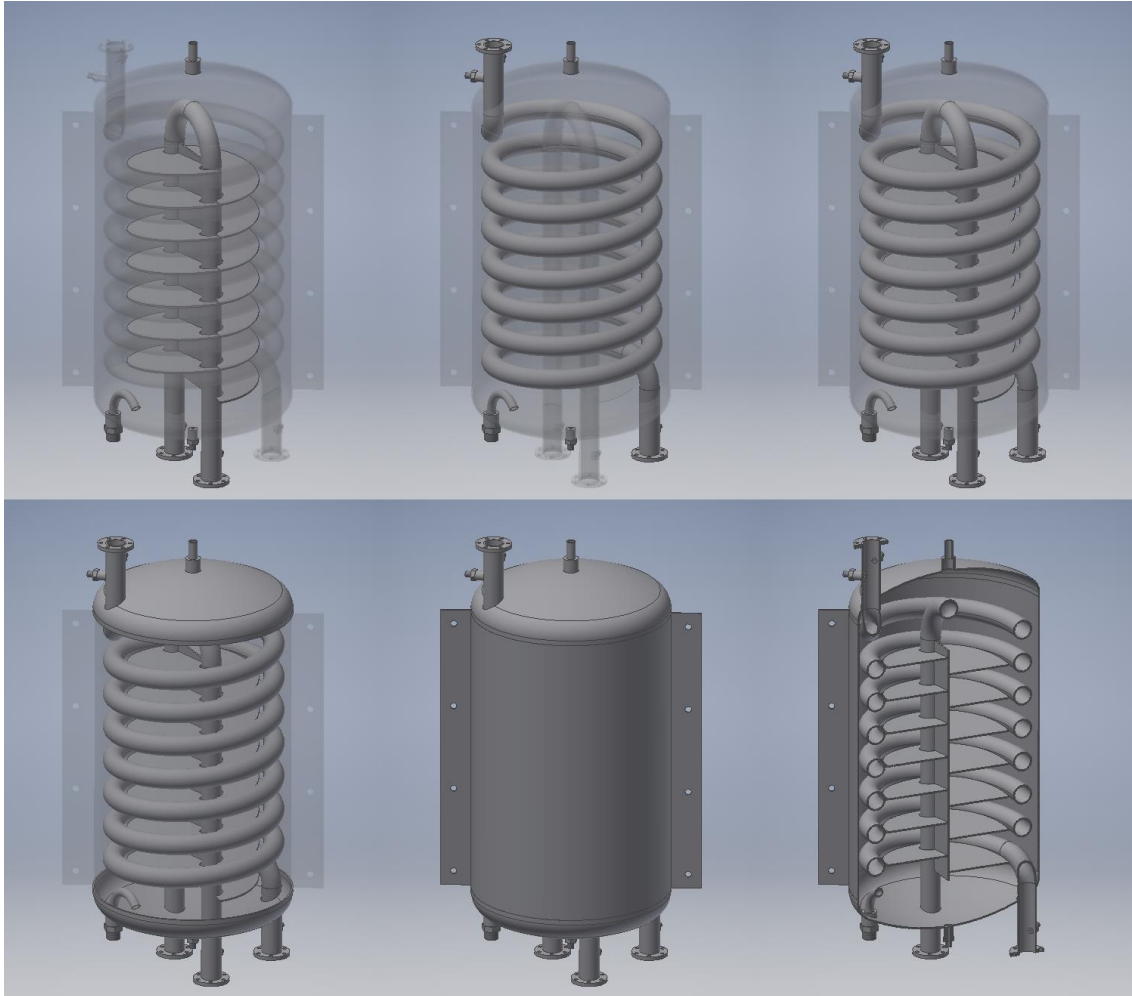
CAD drawings of the Cooler-2. There are shown:
